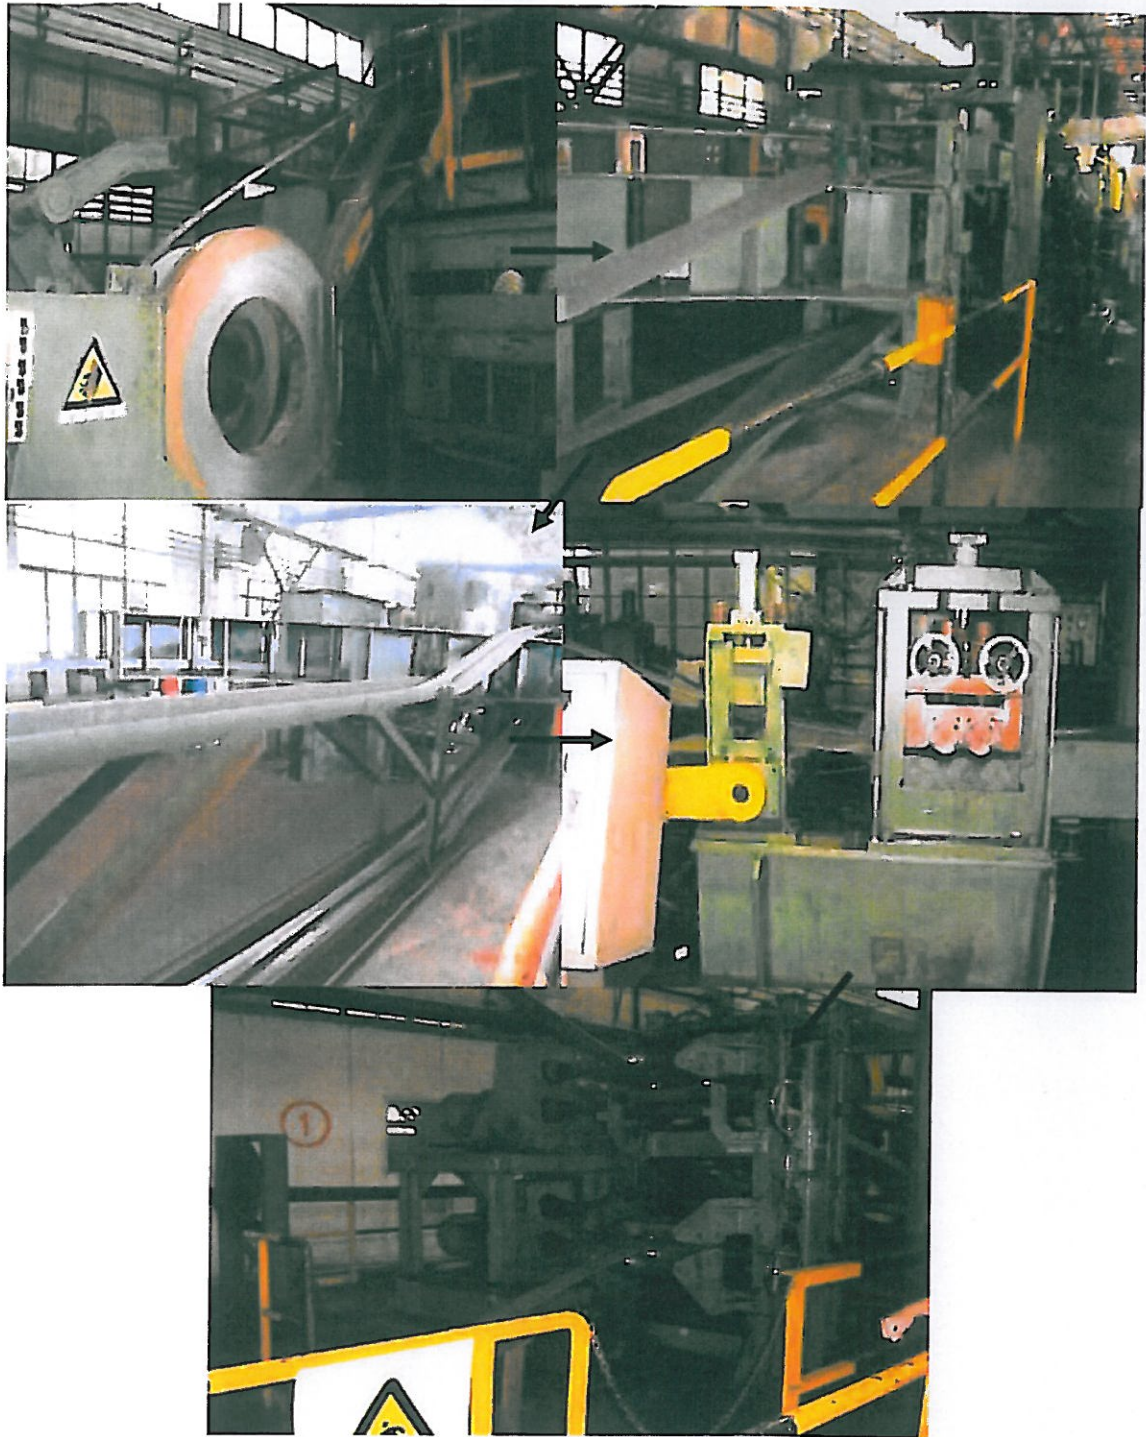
The uncoiled steel rolls are processed into three pre –straightened steel strips before entered into “Patented” welded hea for high frequency welding
